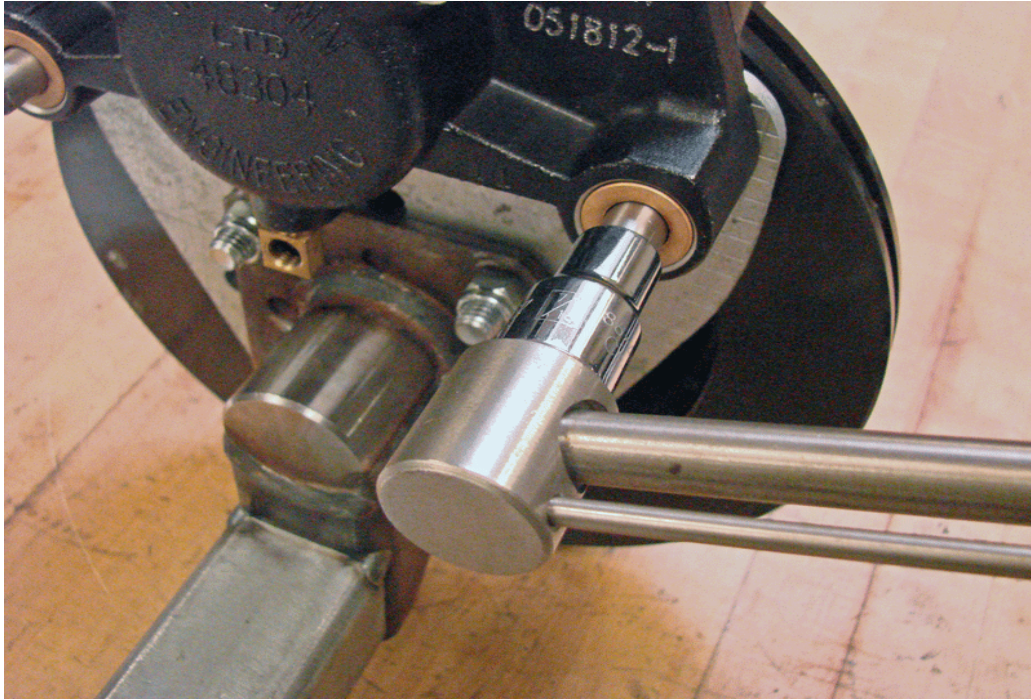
For Reference, On this Traditional Beam Style Torque Wrench the Setting Reads 35 Foot Lbs, the Correct Torque Setting for the 2 Slider Pins.
